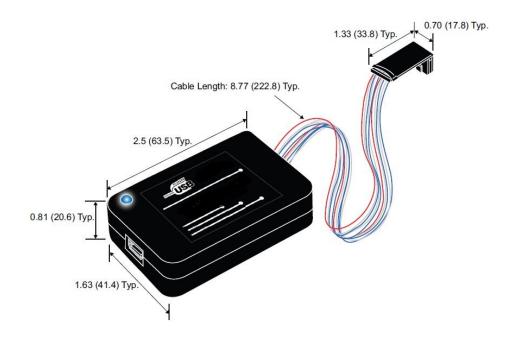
Intel FPGA Download Cable II Dimension - Inches and Millimeters
